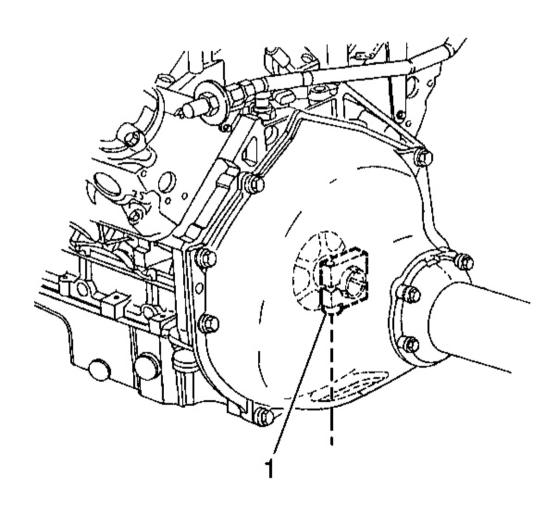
Propeller Shaft Hub Clamp & Bolt Courtesy of GENERAL MOTORS CORP.
